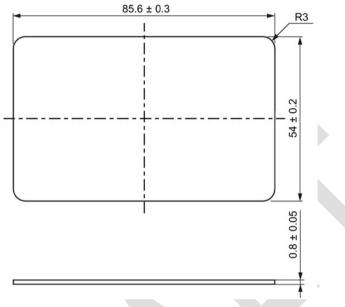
Dimensional drawing MDS D400 (dimensions in mm)
